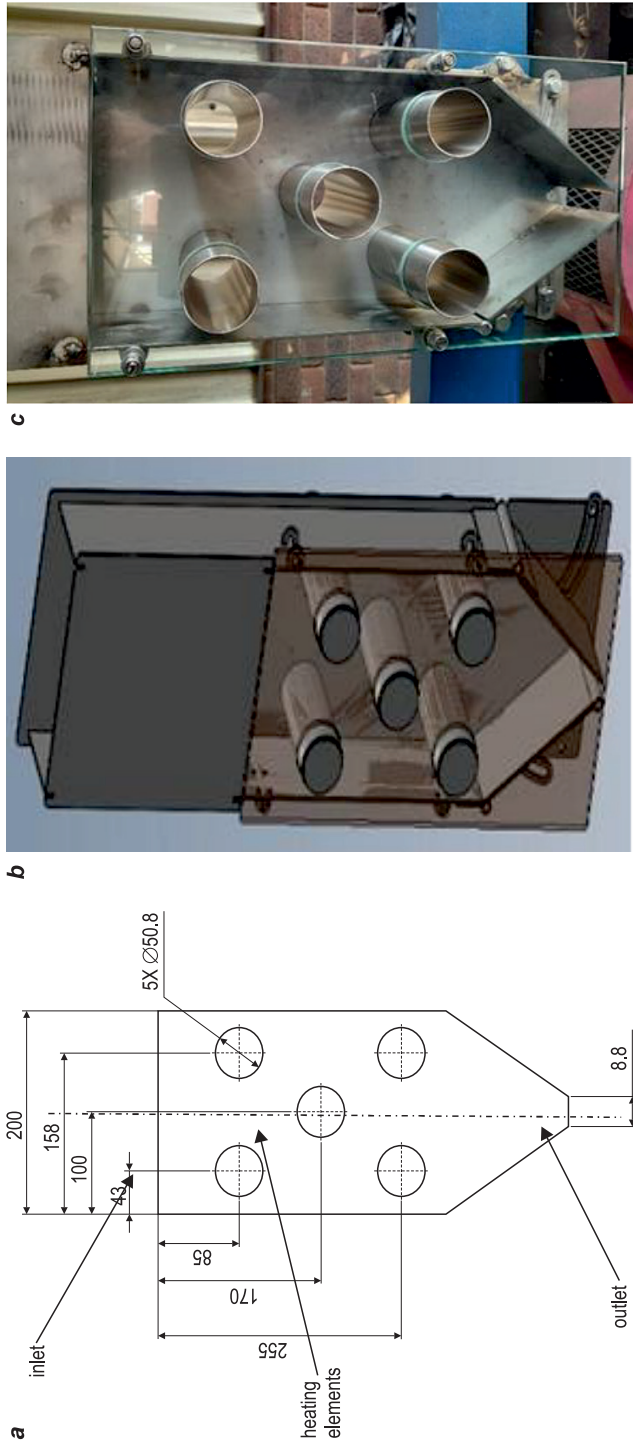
Heating/cooling exchanger: *a* – dimensions, *b* – design isometric view, *c* – test rig view
